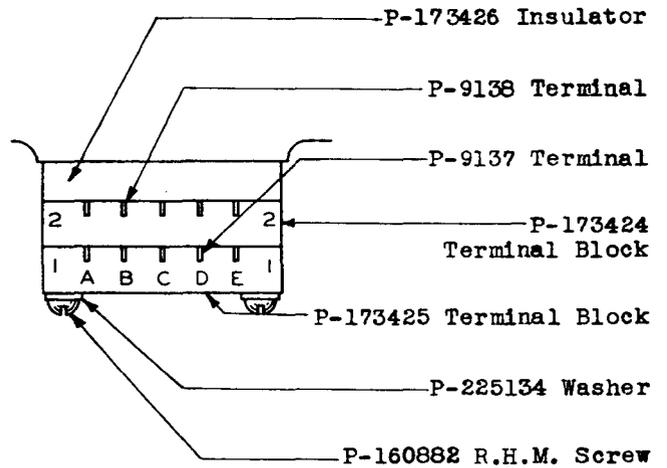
Terminal Block Assembly Parts (No. 171A Interrupter)
